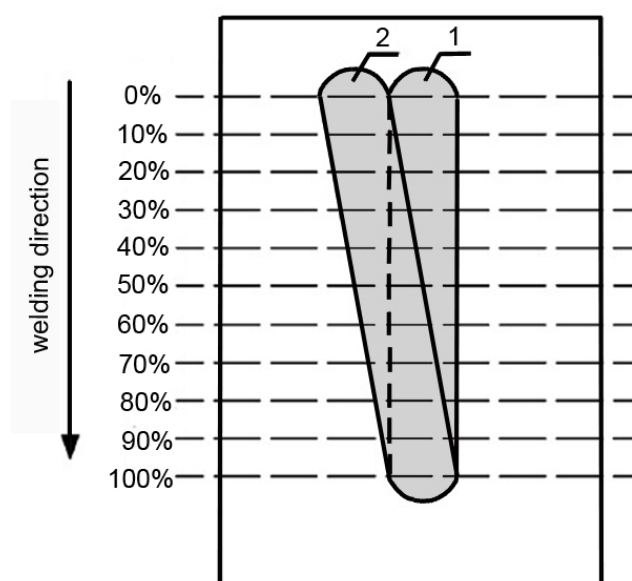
Schema of the temper bead welding specimens; 1 – first bead, 2 – second bead
